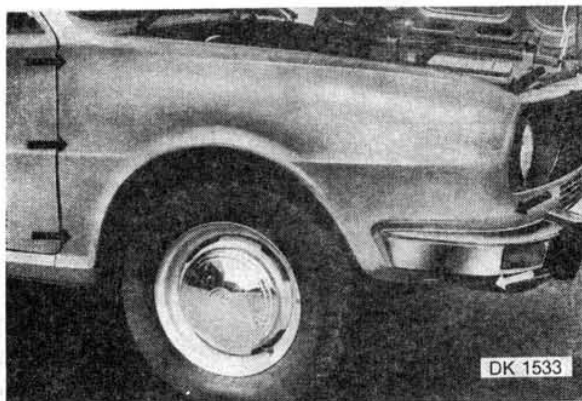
/1 - Removing Front Wing - arrows indicate fastening points
